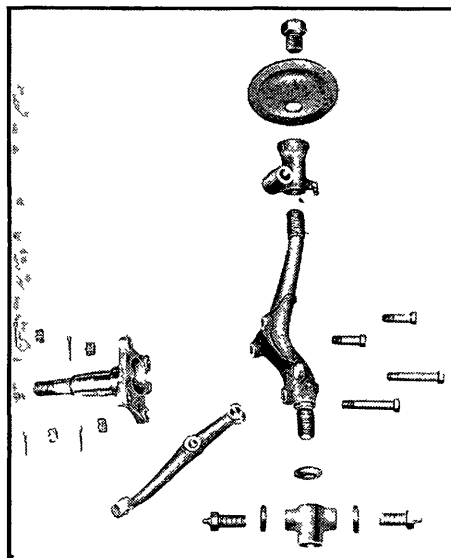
Layout of steering knuckle and pin parts. 1950-51 Rambler and All 1952
